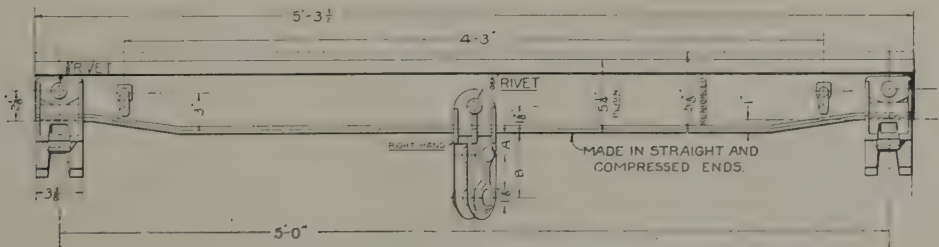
Sterlingworth Compressed End Freight Brake Beam.
